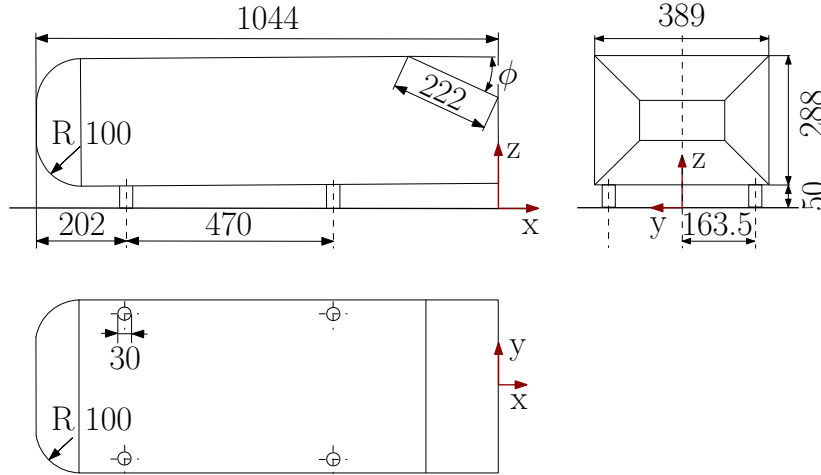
Geometry definition of the Ahmed Body. Dimensions in mm.
